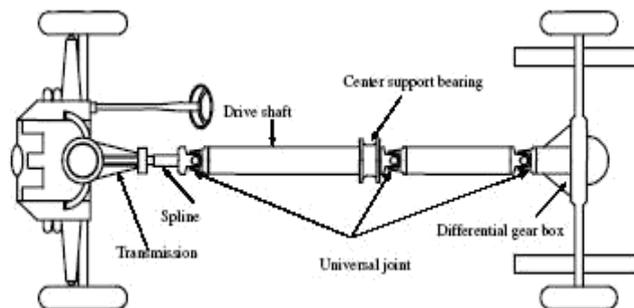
Conventional two-piece drive shaft arrangement for rear wheel vehicle driving system [2].
